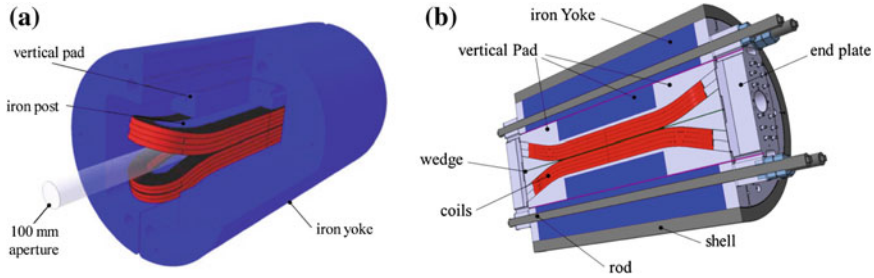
a A cutaway sectional view of the FRESCA-2 dipole coils and the beam aperture. The coil ends are bent upwards supported by wedges [13], b a longitudinal cross-section of the FRESCA-2 dipole coils (© CEA/IRFU, P. Manil, J.F. Millot)
